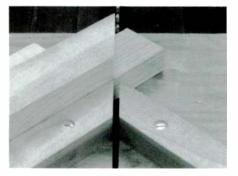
Using a cut piece to check the alignment for making a second identical piece.
